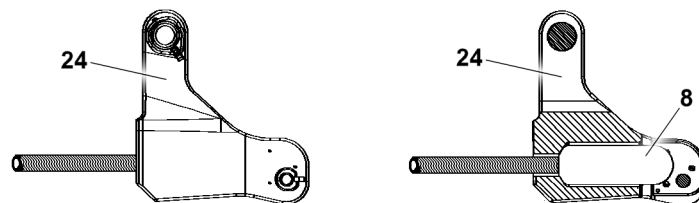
L-shaped rope lock, with locking clamp / locking cast sleeve
